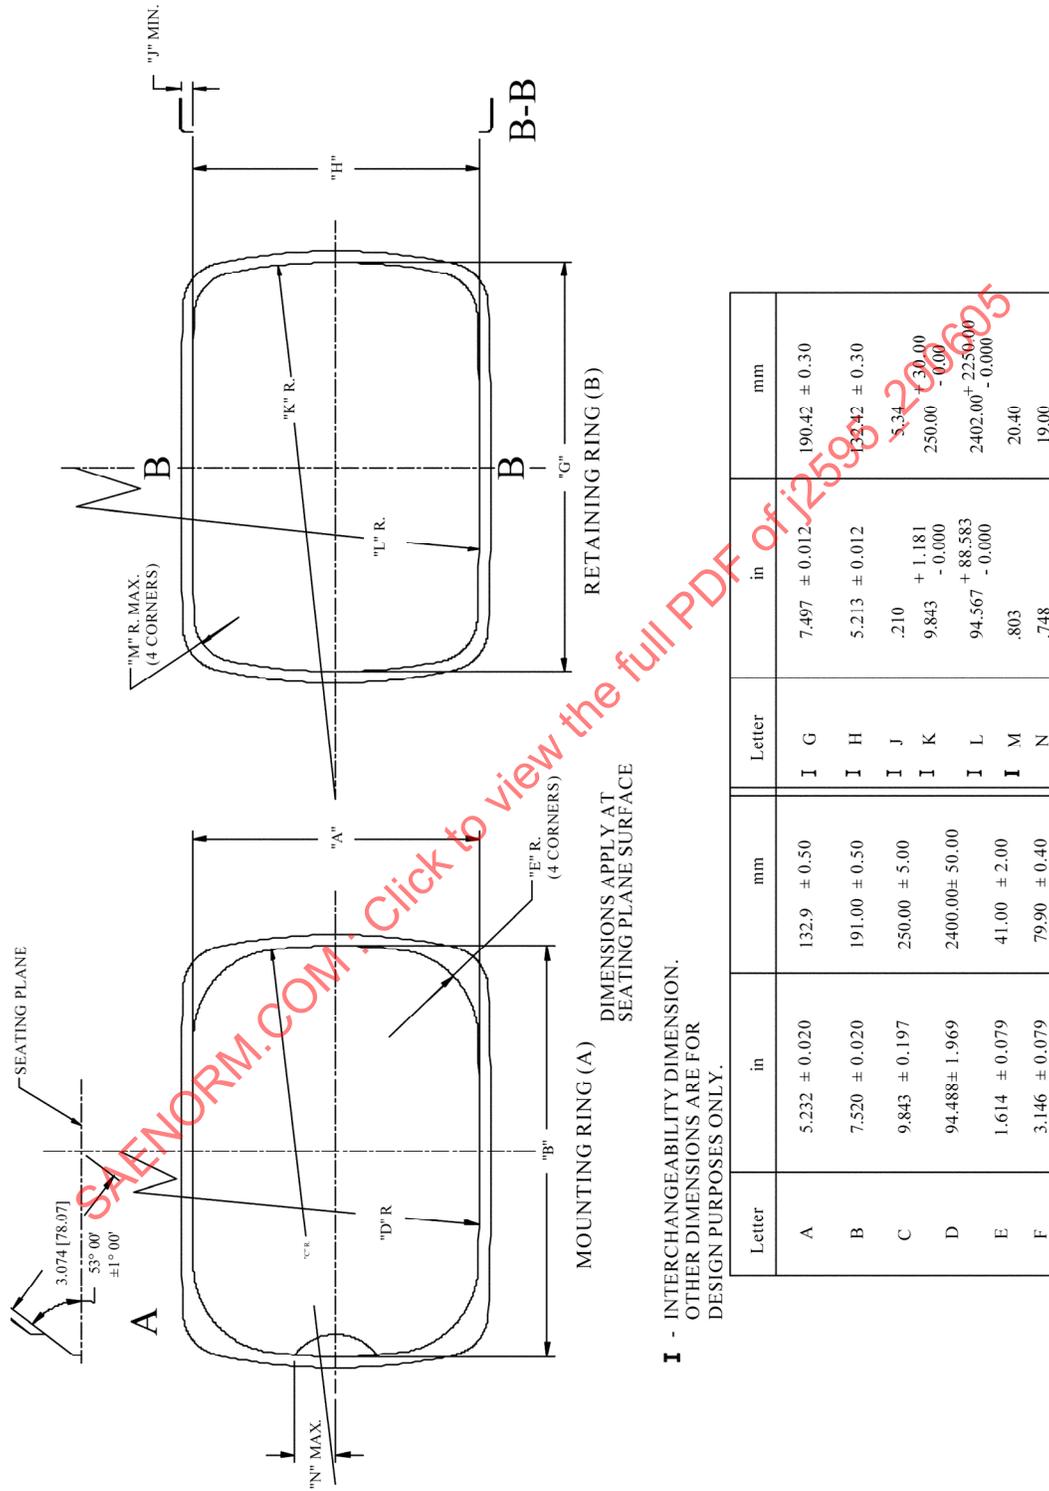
(A) FRONT VIEW OF MOUNTING RING OR LAMP BODY FOR 142 x 200 mm RECTANGULAR HEADLAMP; (B) RETAINING RING
